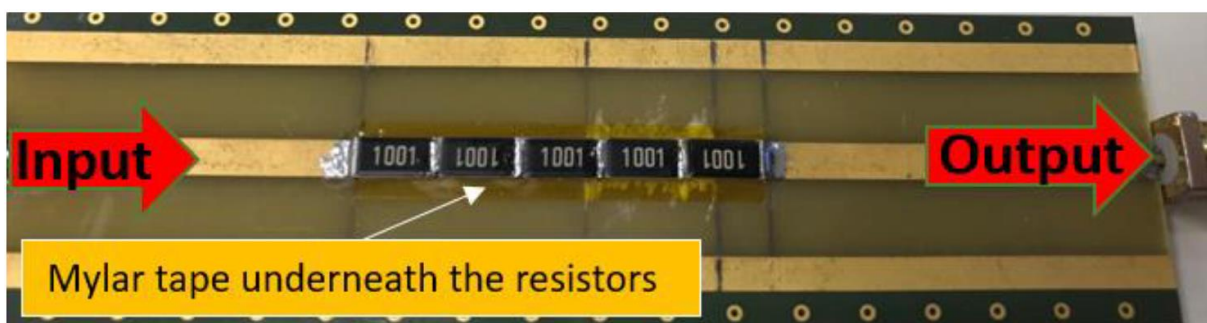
Fabricated high-resistance voltage probe consisting of five  $1 \text{ k}\Omega$  SMD resistors (2512 package) soldered in series on a microstrip transmission line. The design implements capacitive balancing through optimized PCB geometry to achieve a flat frequency response and  $3 \text{ GHz}$  bandwidth.
